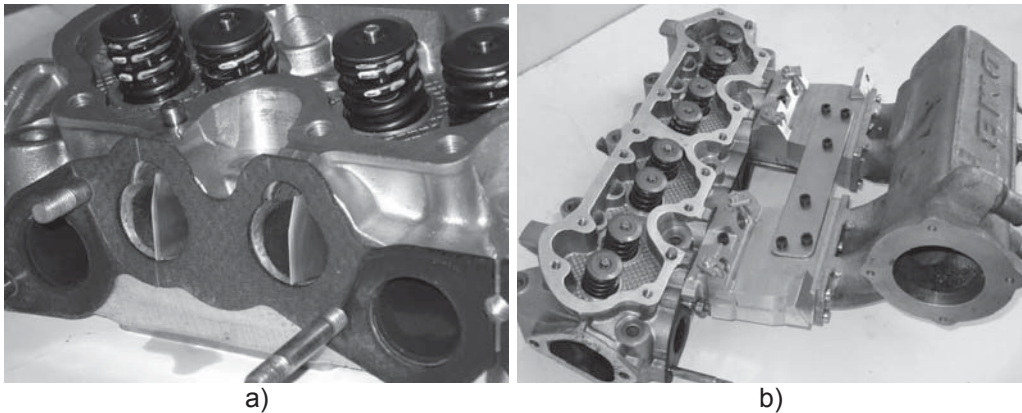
Detail of engine head with longitudinal tin plates inserted in head induction channels (a) and assembly of engine head and the prototype of variable induction system "Dual port" (b).
